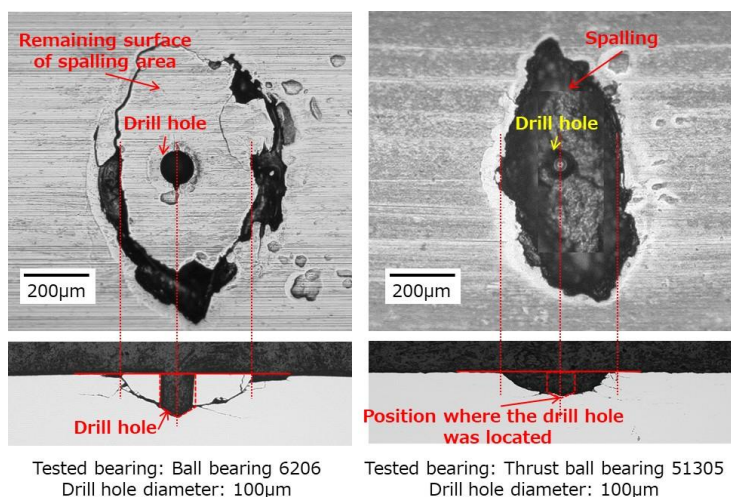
Appearance and cross-sectional observation of spalling area from drill hole
